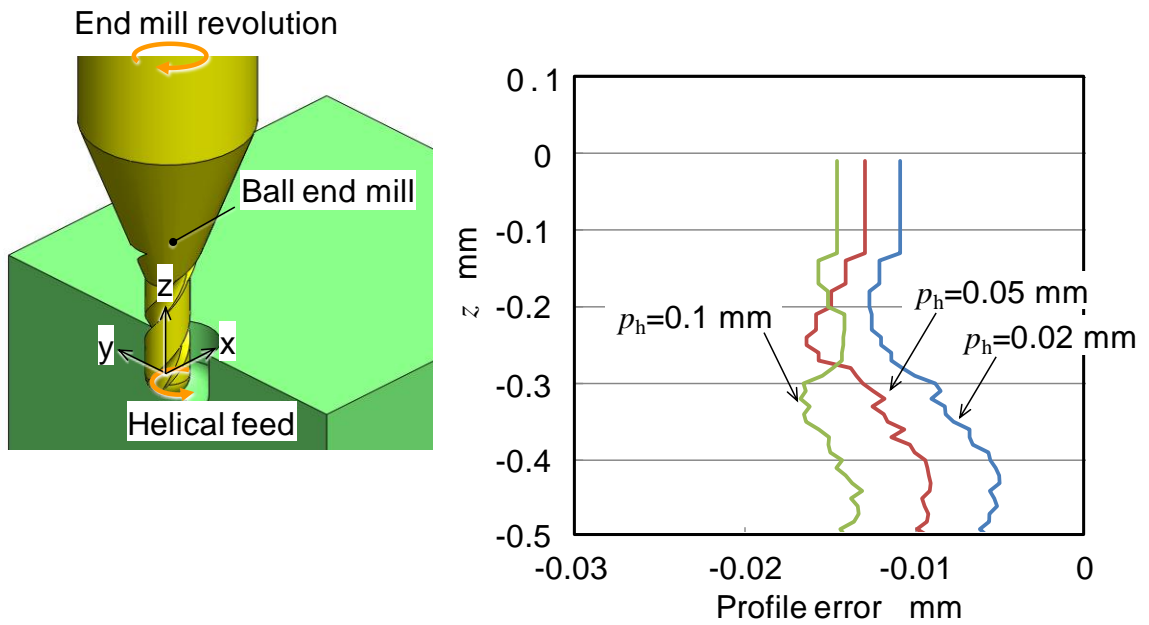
25 Relationship between helical feed pitch p_h and Profile error of the machined surface for CCW (Down milling), flank wear $VB=0.01\text{mm}$, and helical feed radius $R_o=0.4\text{mm}$.
